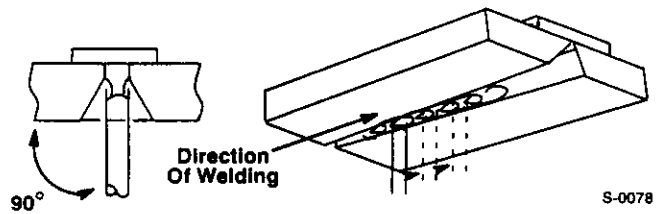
Overhead Butt Weld – Root Pass
